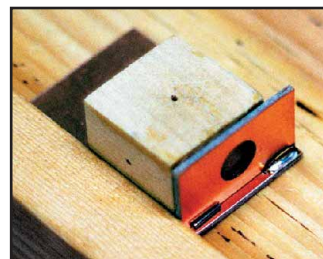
Use one hand to hold the printed circuit board pieces and small wood block in the cutting jig. Two $\frac{1}{4}$ inch lengths of solder are strategically placed at the board intersection. Use the other hand to bring an iron in and tack the pieces together.
